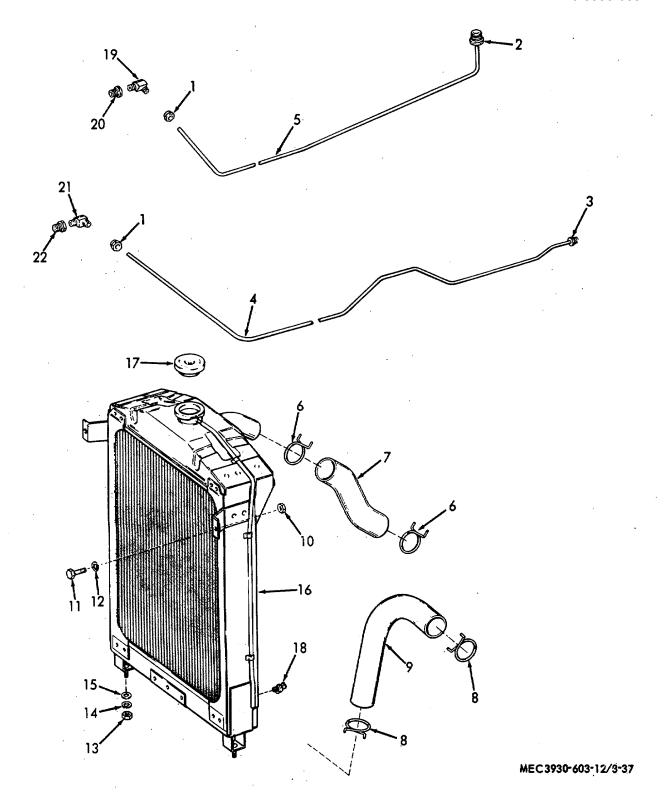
Radiator assembly, lines and hoses, removal and installation
